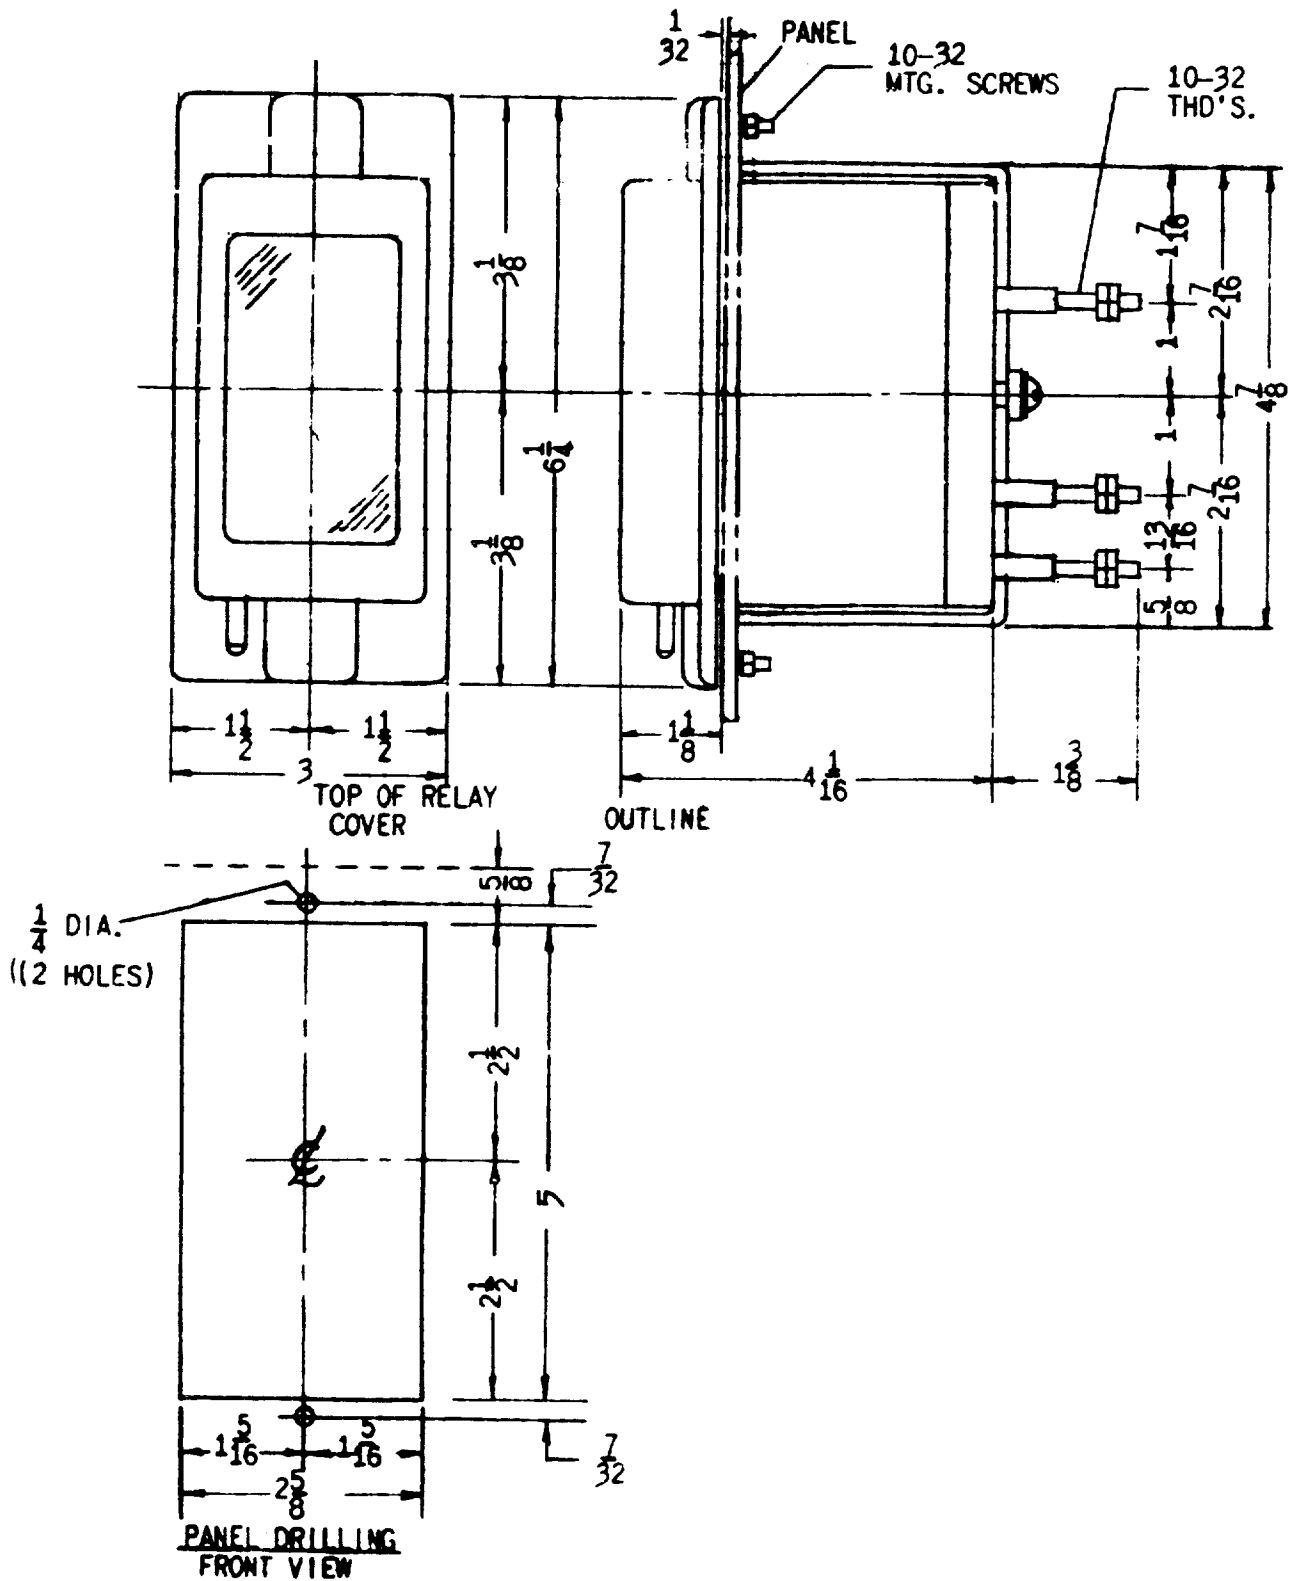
(0127A9555 [3]) Outline and Panel Drilling Dimensions for the Semi-Flush Mounted HAA16B Relay
